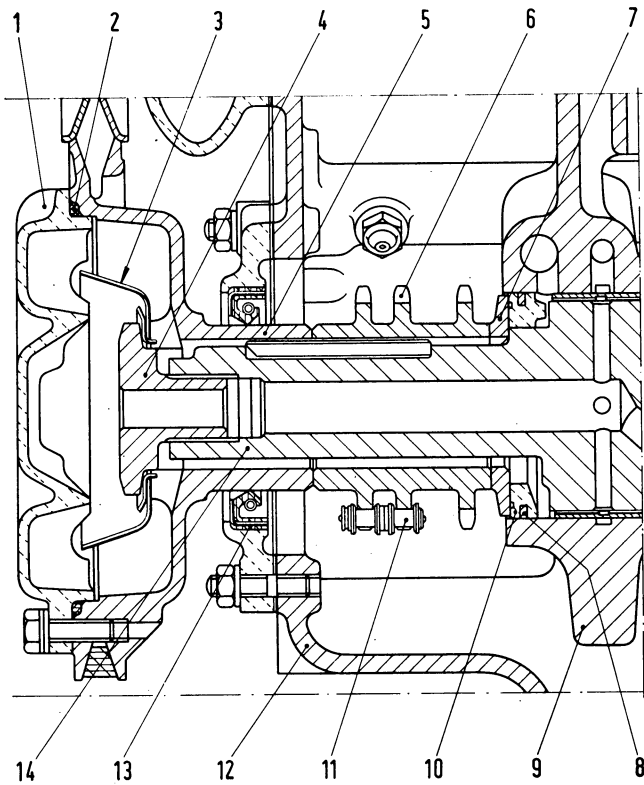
Detail of 118 B.000 engine side section view across centrifugal oil filter.
